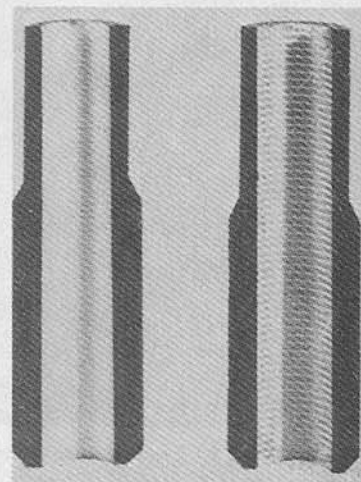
Left view: Straight bore valve guides as used in the TE20 and TO20 engines. Right view: Spiral grooved valve guides as used in the TO30 engine. TO30 guides are used in servicing the TE20 and TO20 engines.
